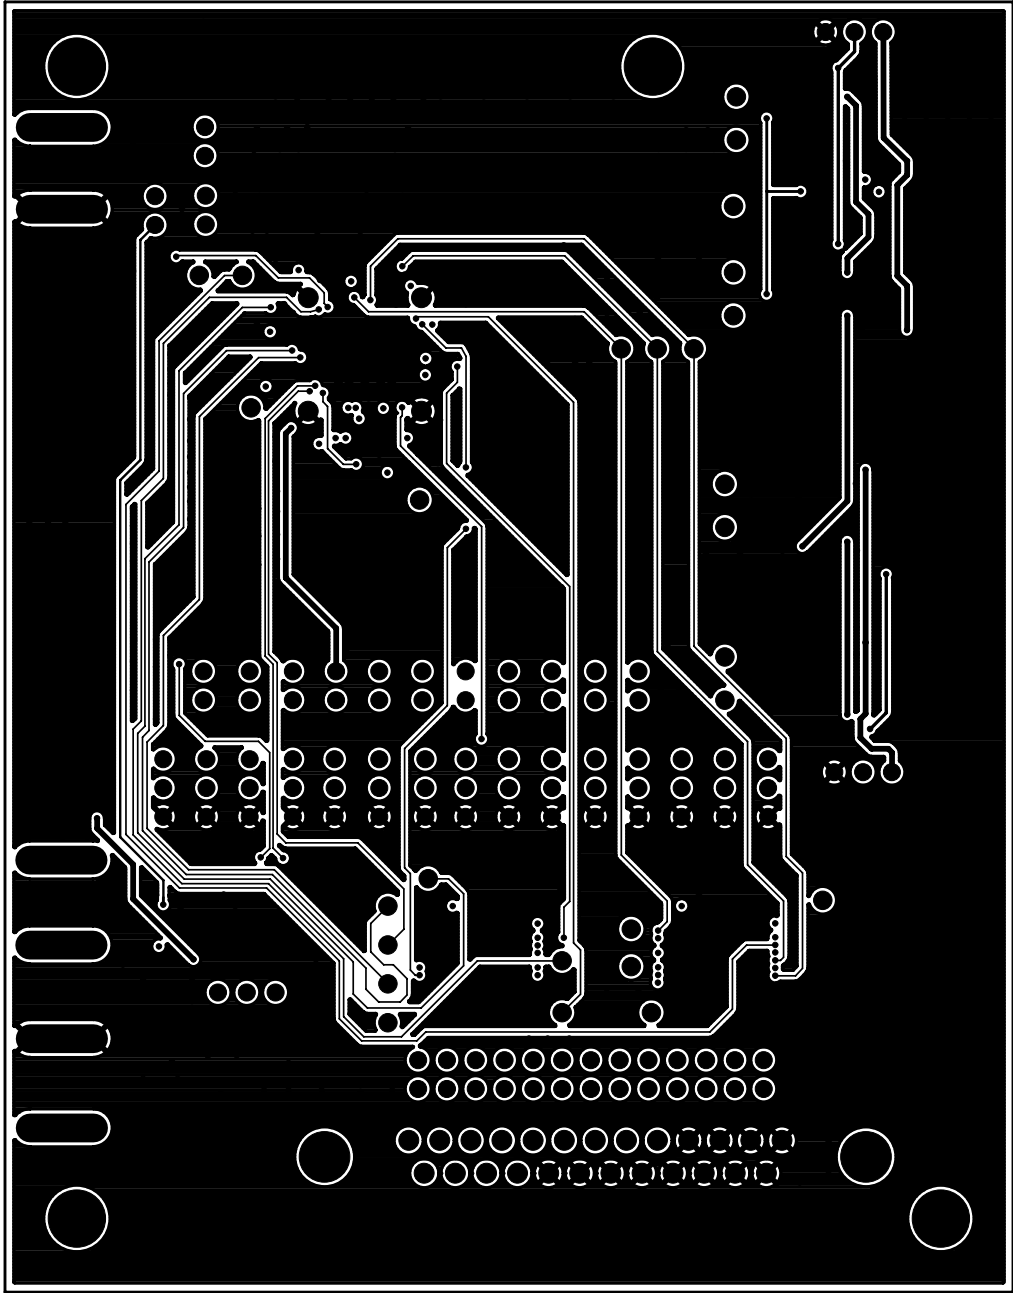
MAX2831 EV Kit PCB Layout—Inner Layer 3 (Routes)
